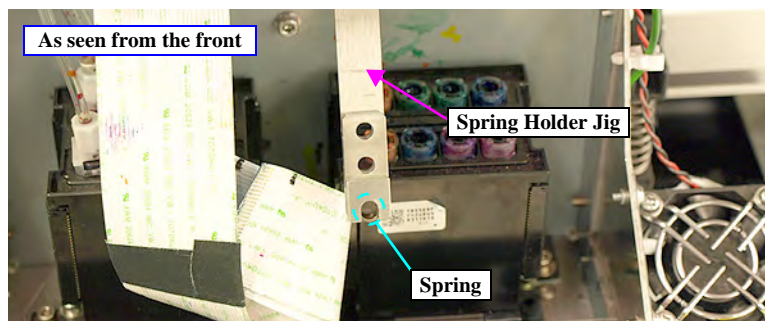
Removing the PRINT HEAD (with the VALVE ASSEMBLY, HEADs)
